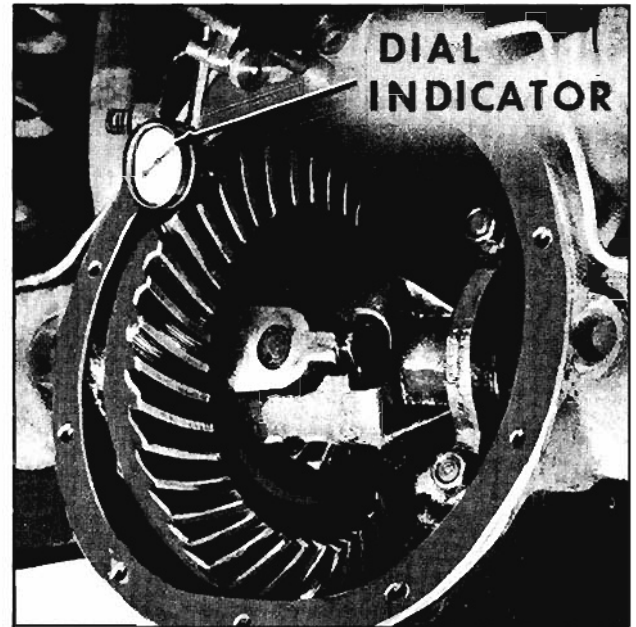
Checking Ring Gear to Pinion Backlash
